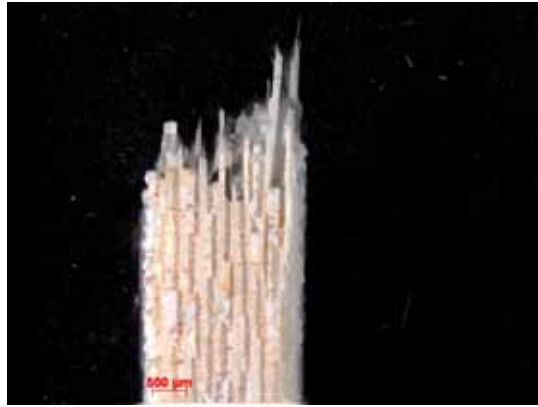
Fracture surface of the N610/LaPO₄/Al₂O₃ specimen with 8ply HSW subjected tension to failure in laboratory air at 1100 °C.
